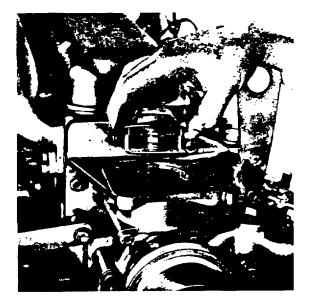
Thermostat Removal. (earlier engines) 3. Remove the thermostat — see Fig. M.14.
